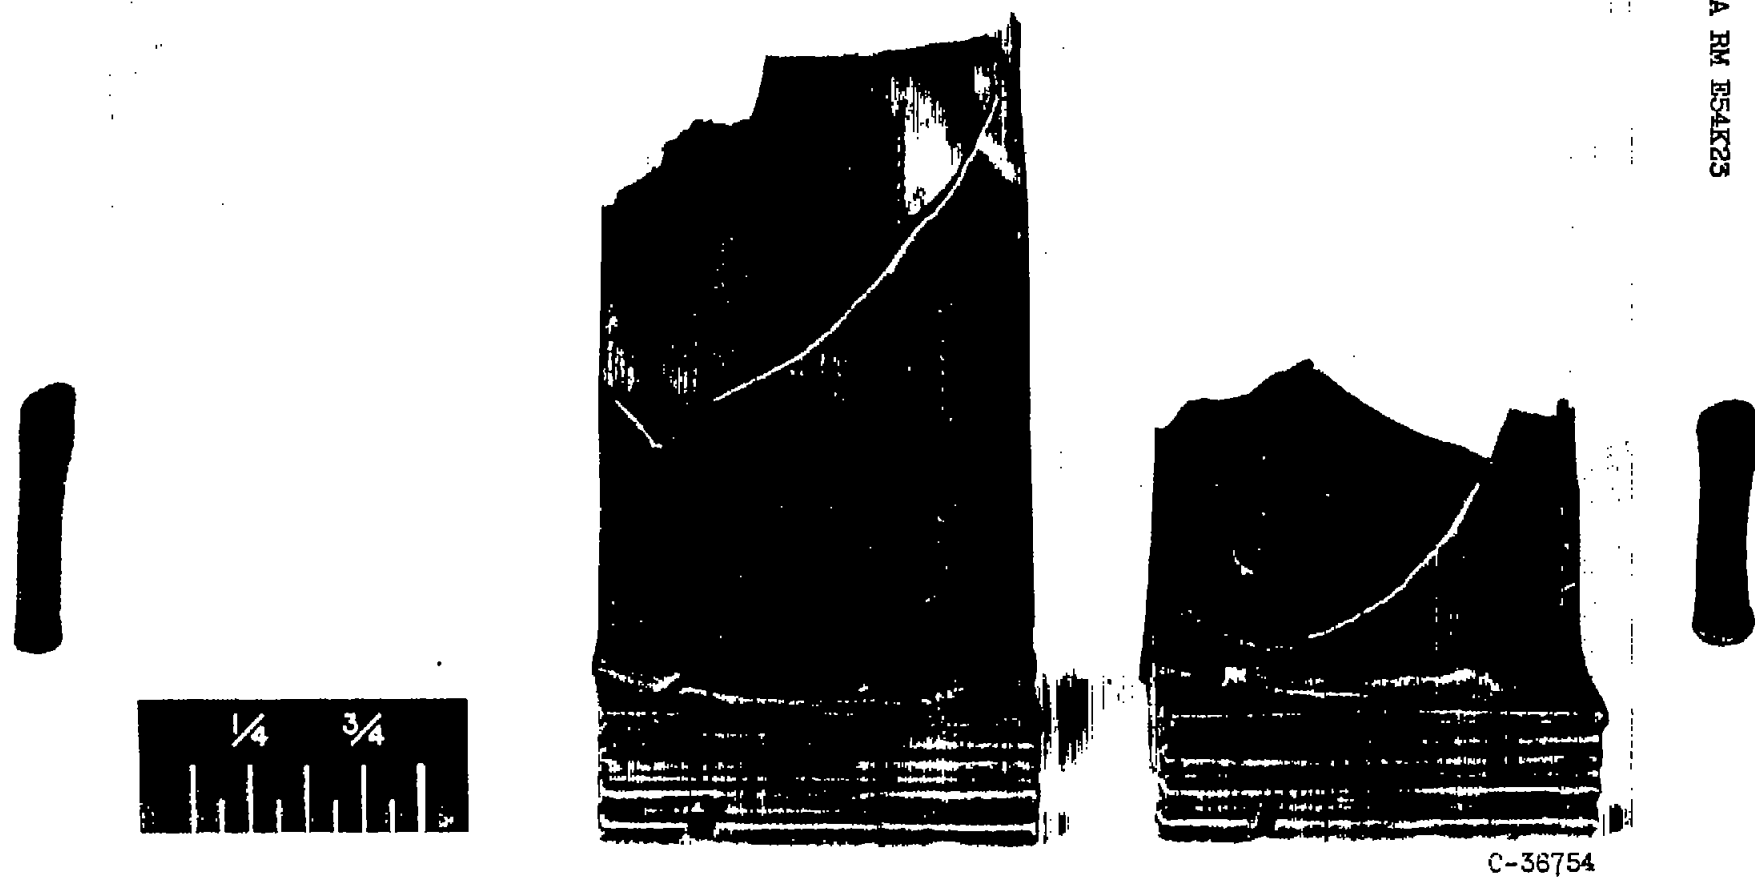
Typical failures of Group 6 sheet-metal blades suspected to have been caused by fatigue.
